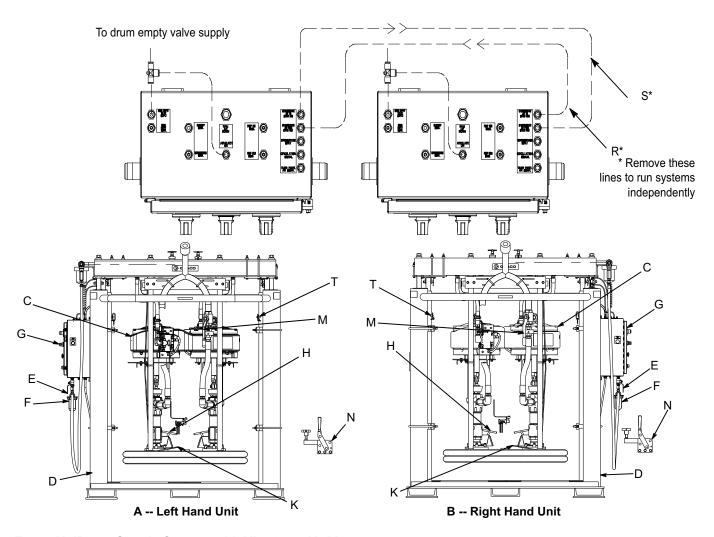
UniDrum Supply System with XL 10000 Air Motors
